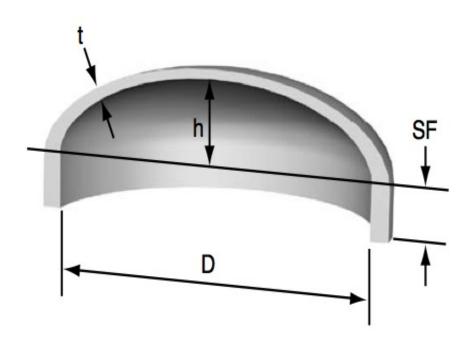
SECTIONED VIEW OF AN ELLIPSIODAL HEAD OF A PRESSURE VESSEL
